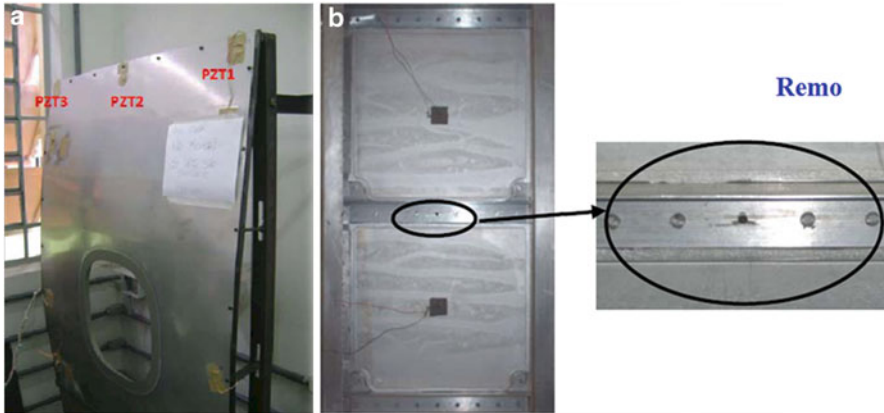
Aluminum panels tested; (a) aircraft window panel; (b) details of a removed rivet simulating the damage
